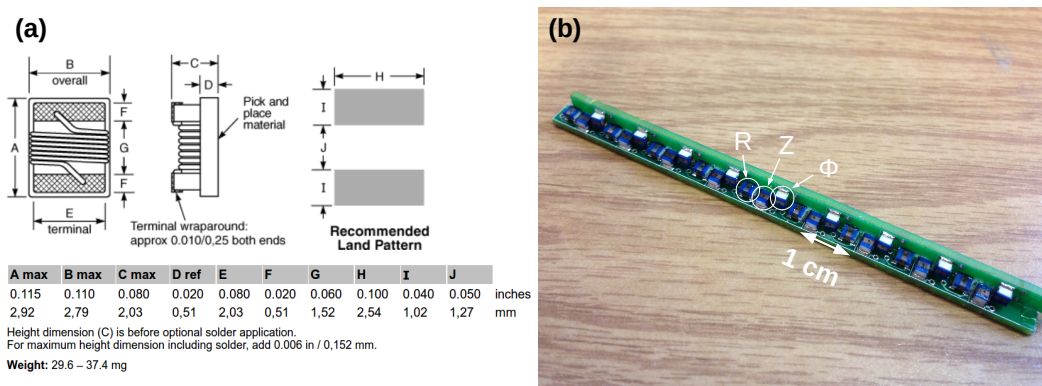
(a) Mechanical drawing of single surface mount coil. (b) Image of 27 channel PCB  $\dot{B}$ -probe array.
